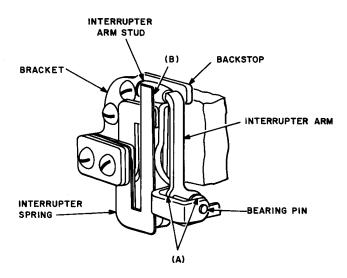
Bell-Crank-Type Vertical Interrupter Spring Assembly
